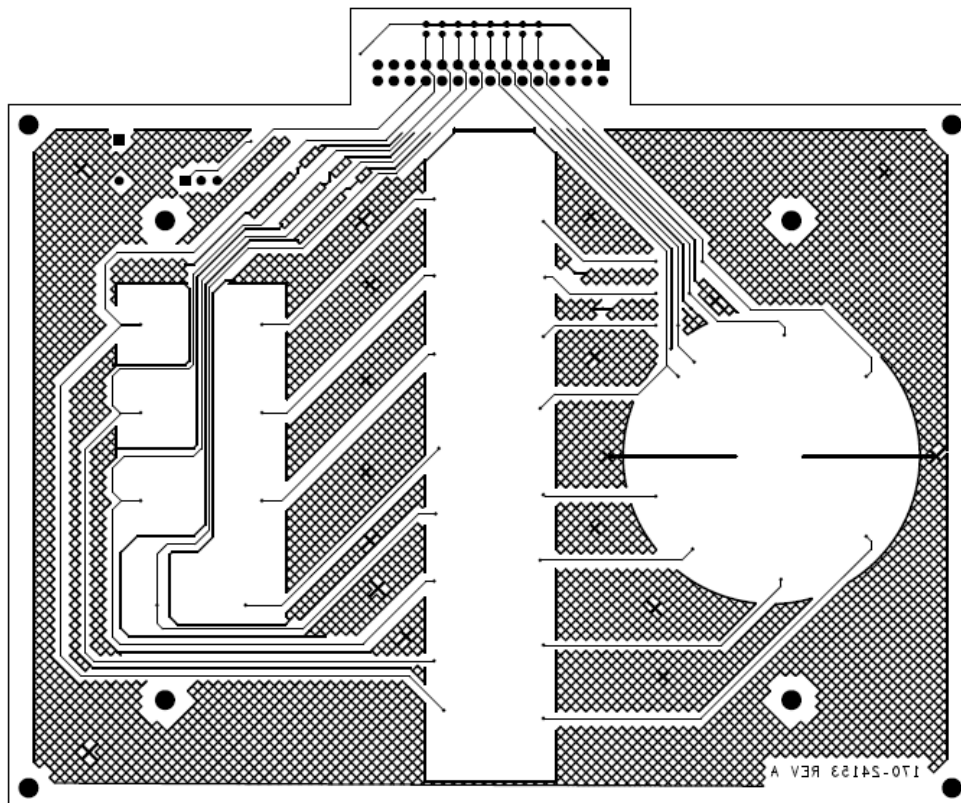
PROXIMITYBOARD0 Board Bottom Etch View
